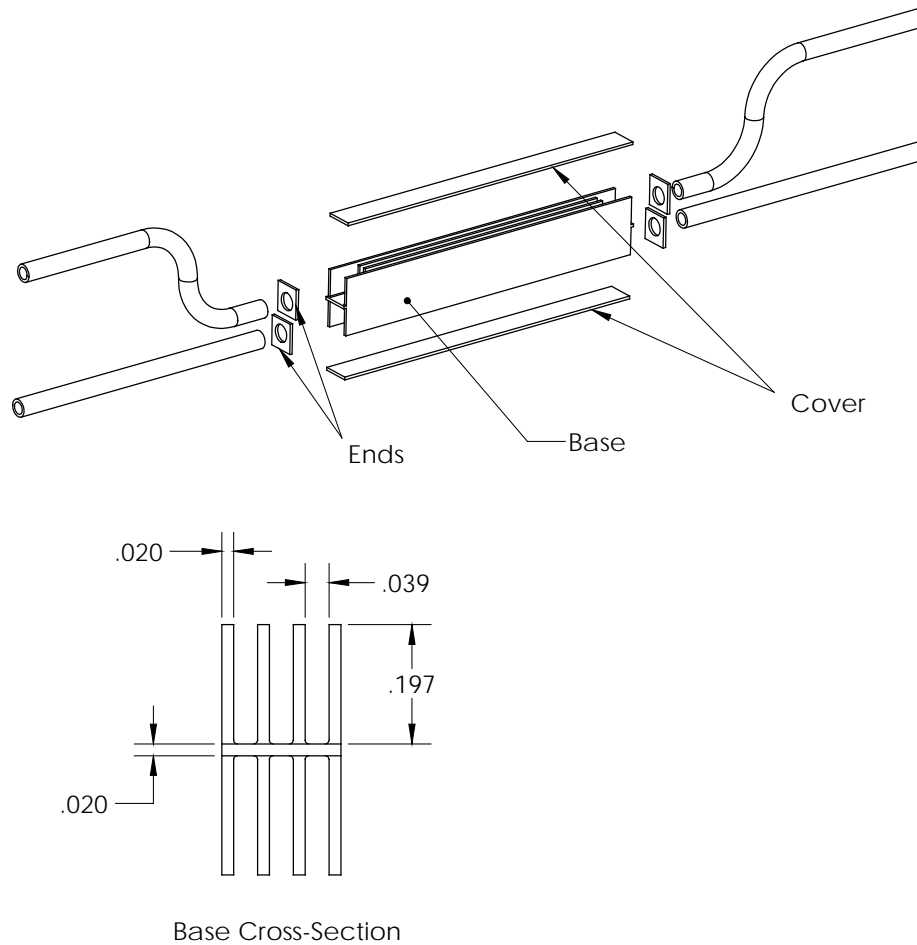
The heat recuperator showing the assembly of the custom fabricated parts
